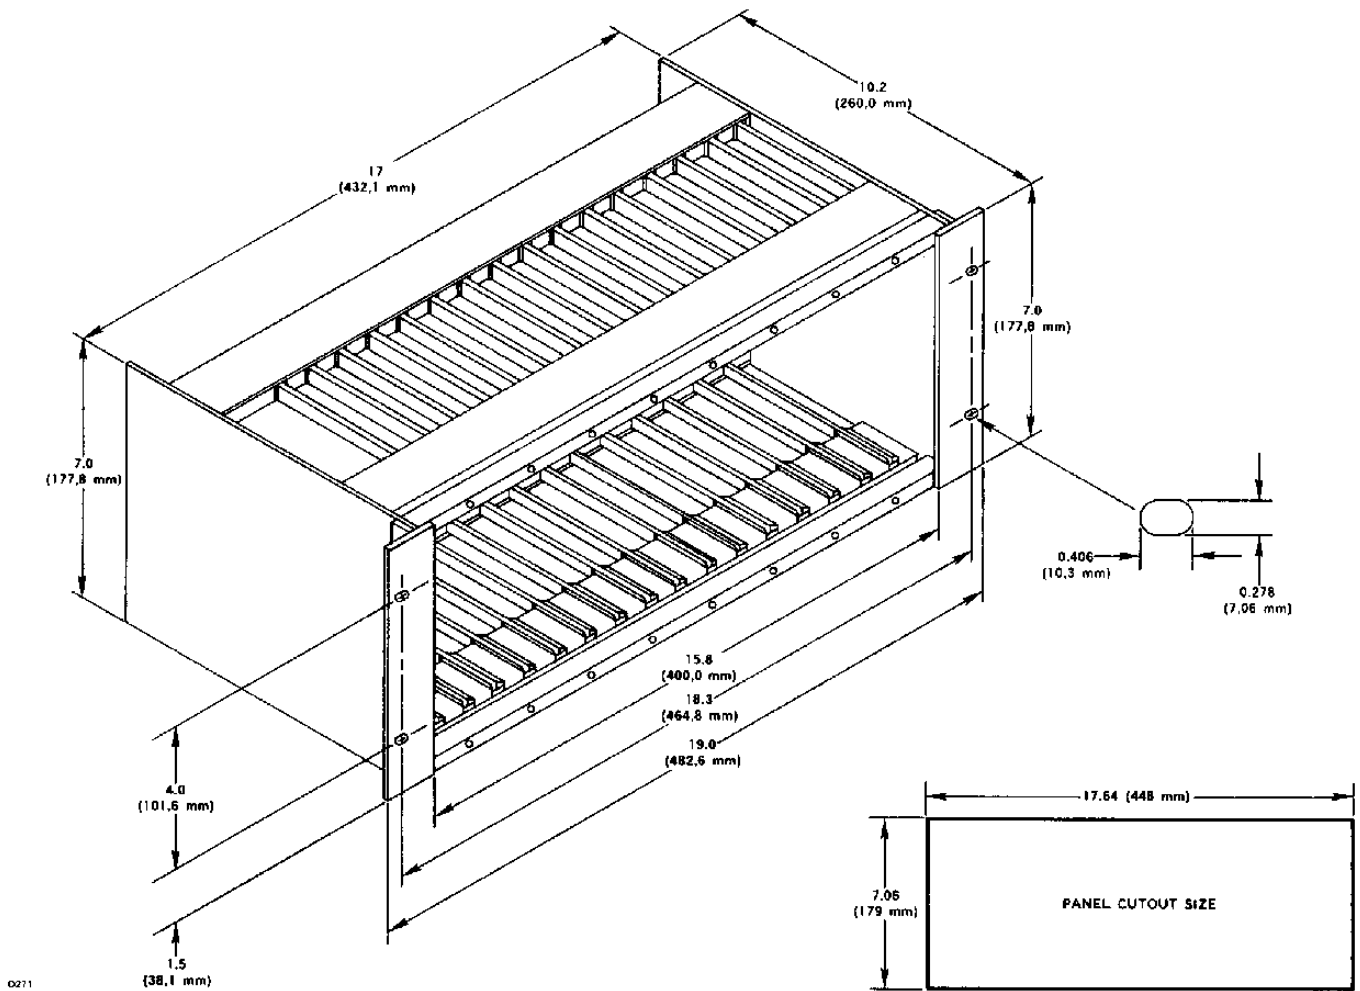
Dimensions of Q4004 Mounting Cage in Inches (Millimeters)
